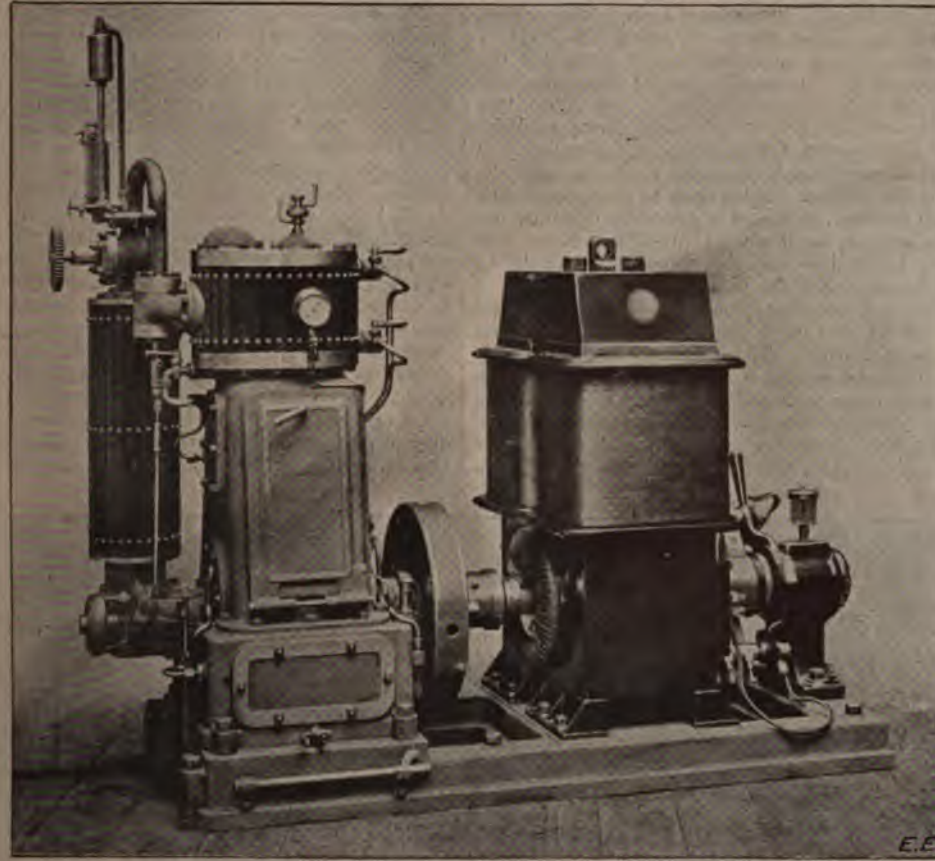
Belliss Single-Cylinder Enclosed Engine, with Throttle Governor, coupled to Mather and Platt Dynamo.
